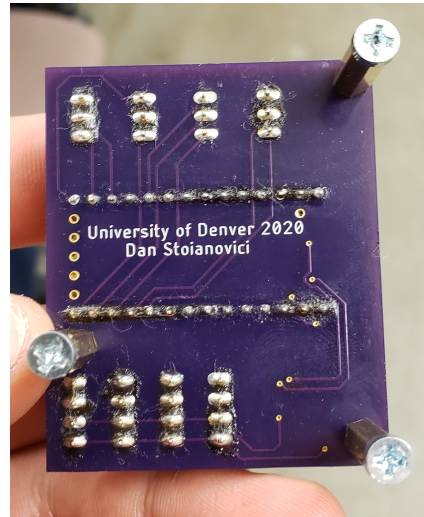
PCB design for Teensy4.0 Motor Controller
